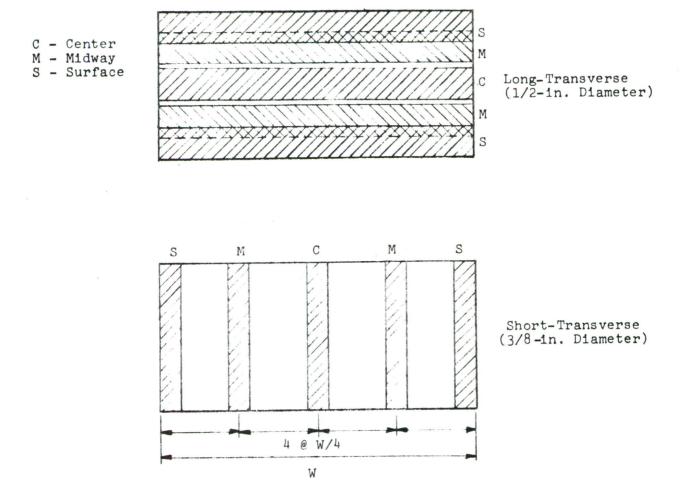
Locations of Tensile Specimens in 3-1/2x7-1/2-in. Extruded Bars.
